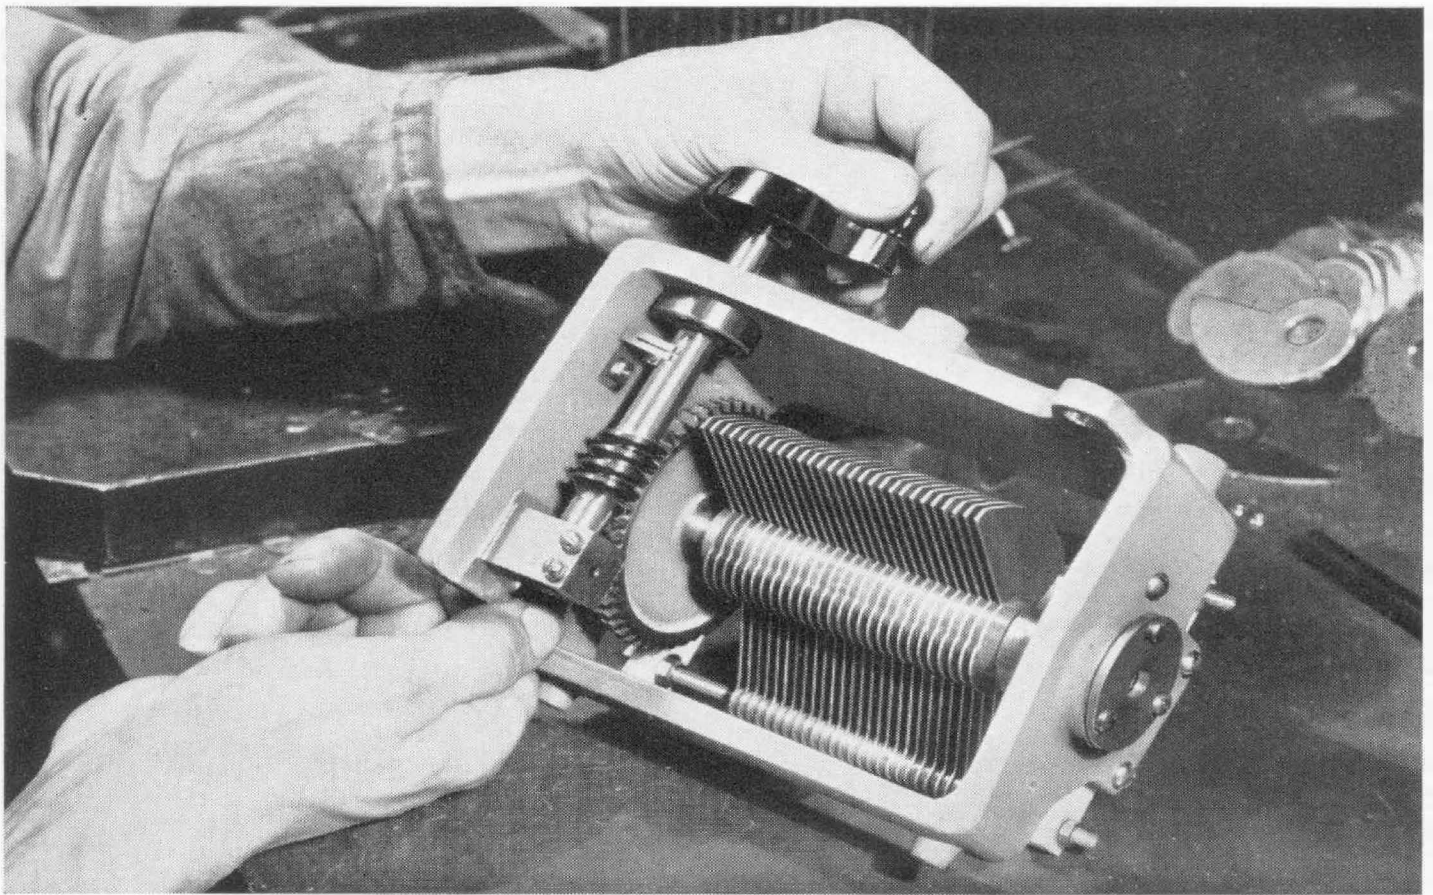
Inspecting the assembled condenser for accurate alignment of plates and smooth action of worm drive
